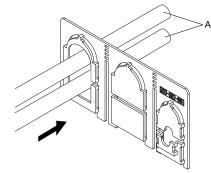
Clip the Cutaway Section of the Wiring Cover
